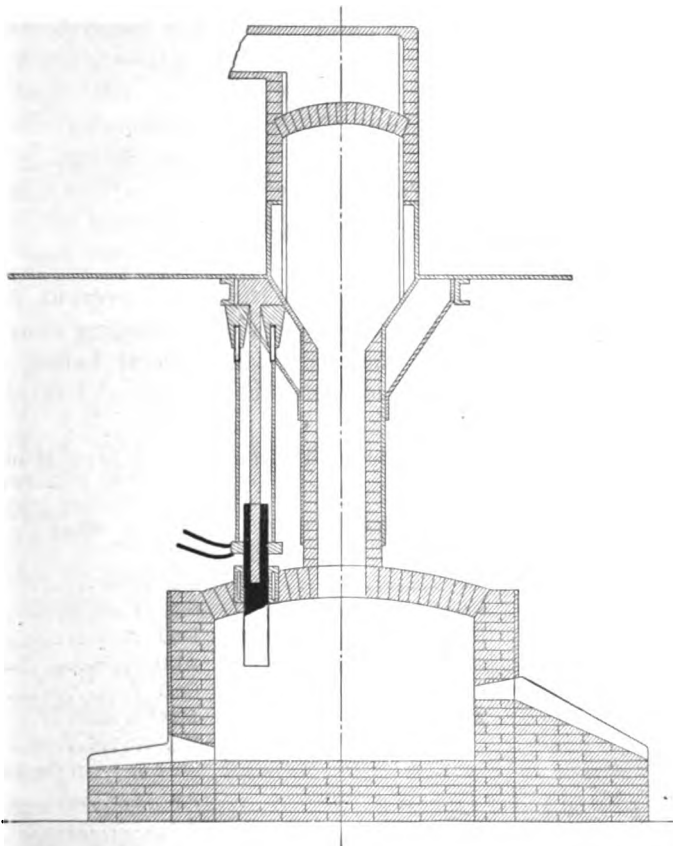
ELEVATION OF ELECTRIC FURNACE.
